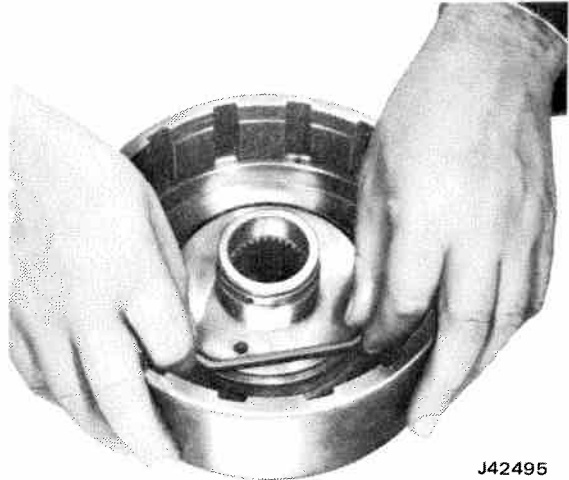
Removing Forward Clutch Piston Outer Seal
